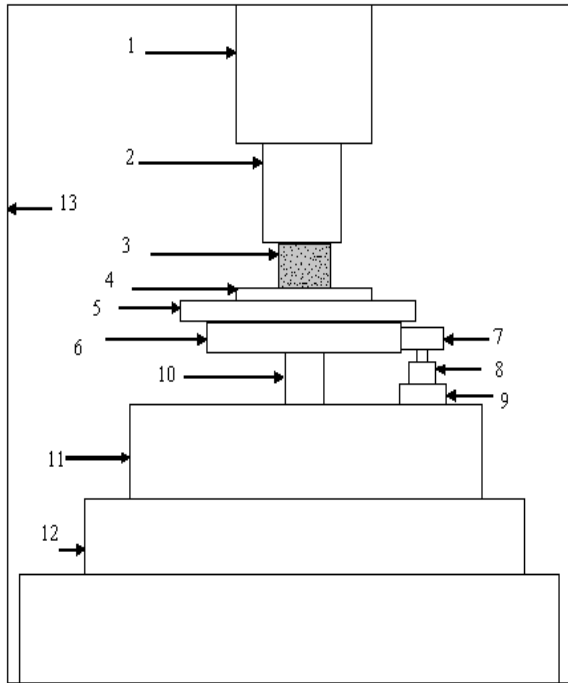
Block Diagram of MAF setup: 1 Spindle; 2 Electromagnet; 3 MAP; 4 Work Piece; 5 Cover Plate; 6 Gear; 7 Pinion; 8 DC Motor; 9 Supporting Plate; 10 Supporting Shaft with Bearing; 11 Base Plate; 12 Table; 13 Frame of Vertical Milling Machine
